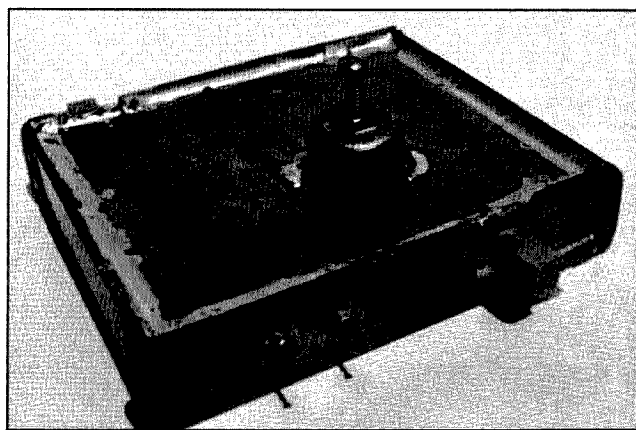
Photo C. The top of the PC board enclosure for the multiplier, showing the pipe cap filter and adjusting screw poking through the lid of the PC board case. Coax connectors for input output and DC feed-through capacitors have been added.
